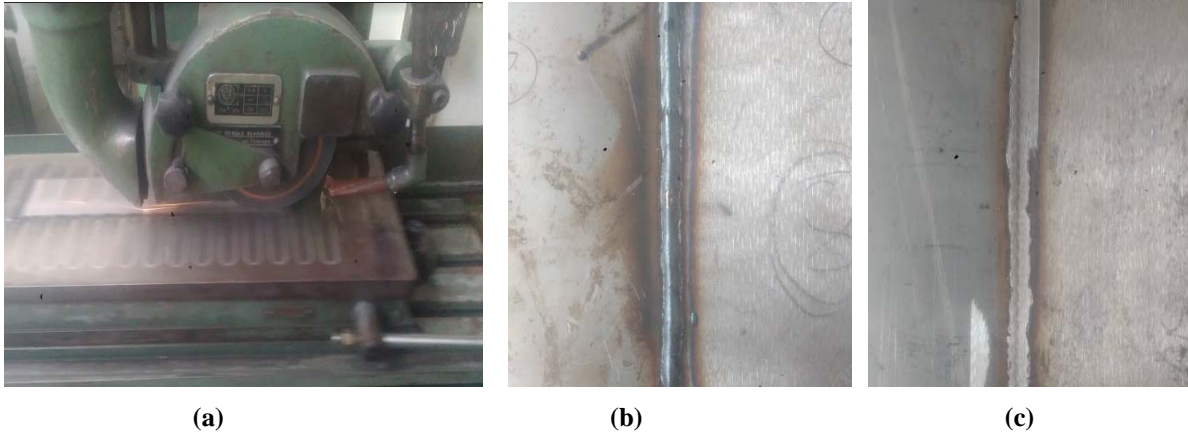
(a) showing grinding process for removing welding bead (b) plate with welding bead on the surface (c) Surface of plate after removal of welding bead.
